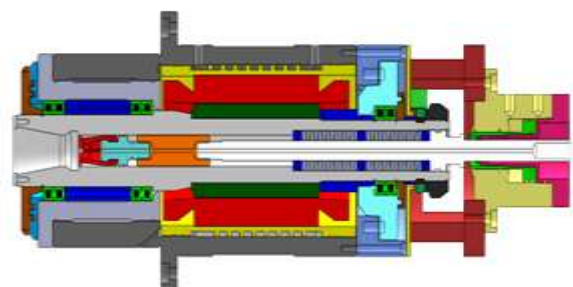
Cross Sectional View of Assembled BT – 40 Spindle
